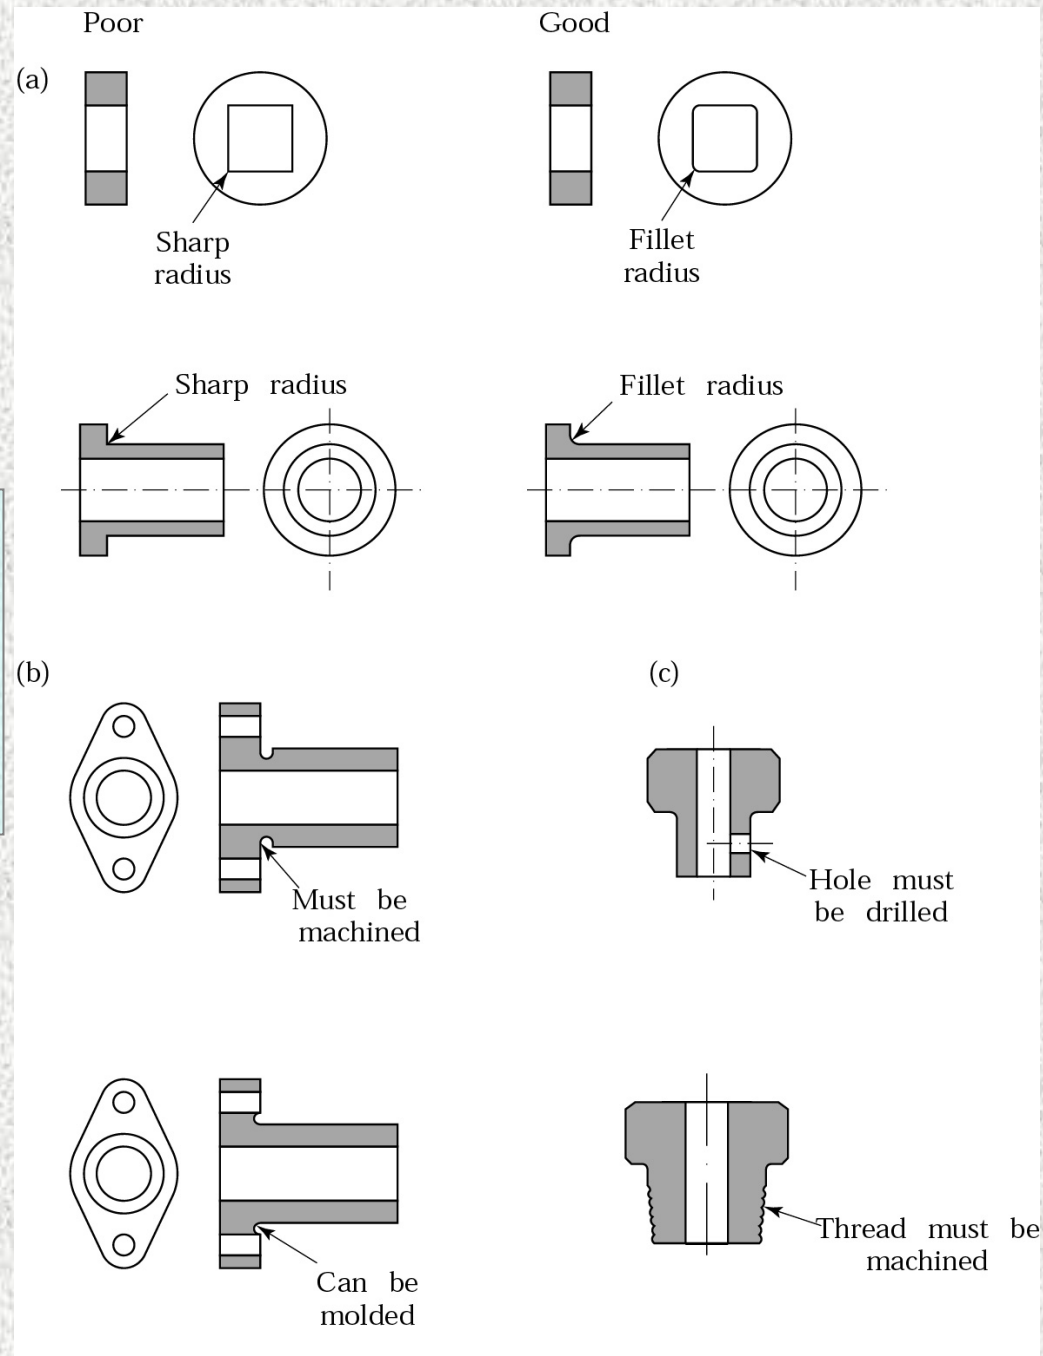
Examples of P/M parts, showing poor designs and good ones. Note that sharp radii and reentry corners should be avoided and that threads and transverse holes have to be produced separately by additional machining operations.
